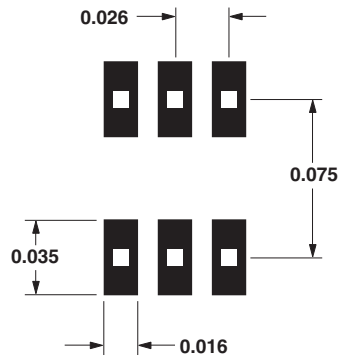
Recommended PCB Pad Layout for Avago's SC70 6L/SOT-363 Products.
